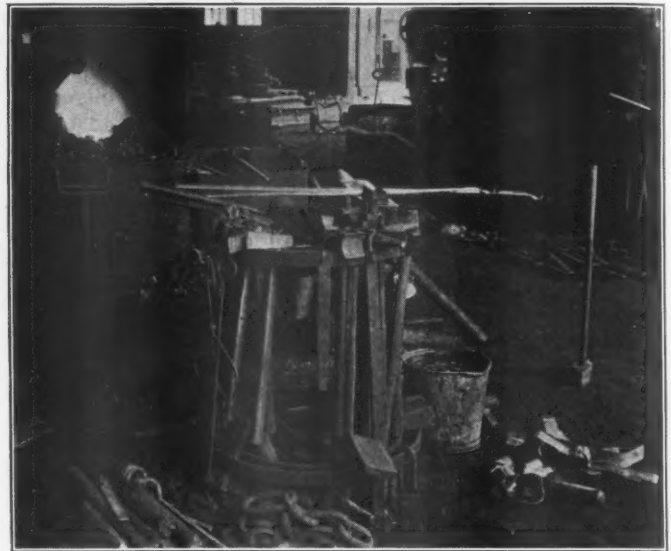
Handy Tool Rack With Sheet Iron Drawer
